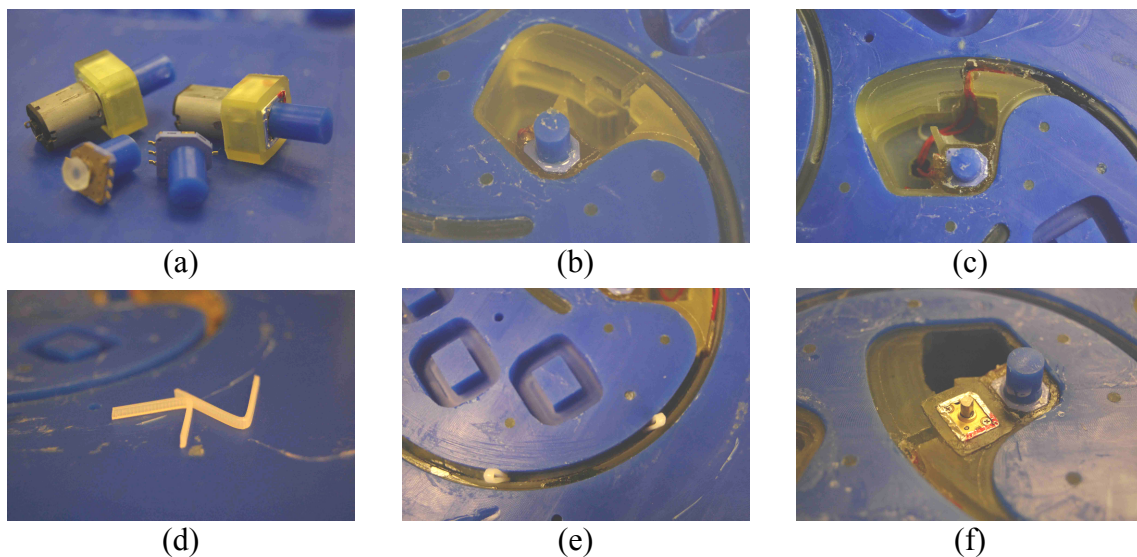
Embedding: Motor/insert/cap assembly (a), Embedded Pot (b), Flex Sensor Wiring (c), Zip Tie Holders (d), Holding the Flex Sensor in place (e), Motor Inserted (f).
